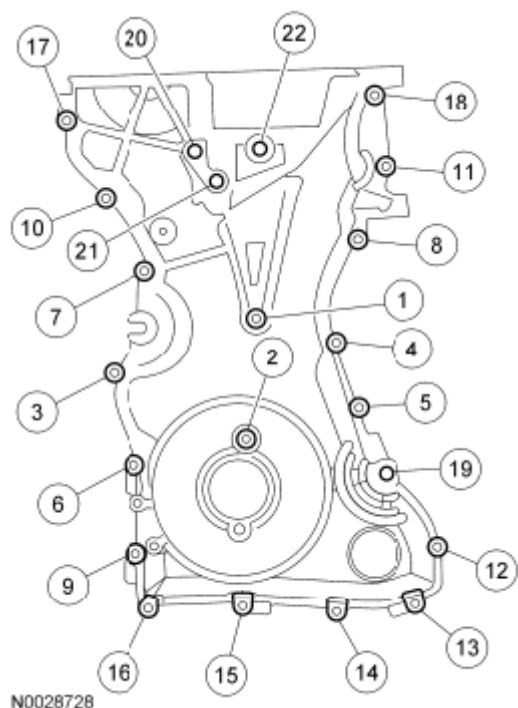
Identifying Engine Front Cover Bolts Tightening Sequence
